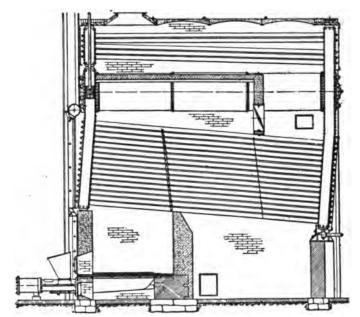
The Edgemoor Water-Tube Boiler with Superheater.
